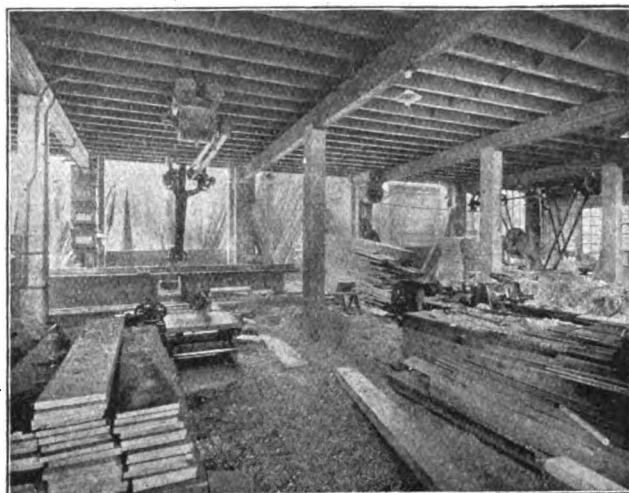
CROSS-CUTTING CIRCULAR SAW DRIVEN BY MOTORS MOUNTED ABOVE.
